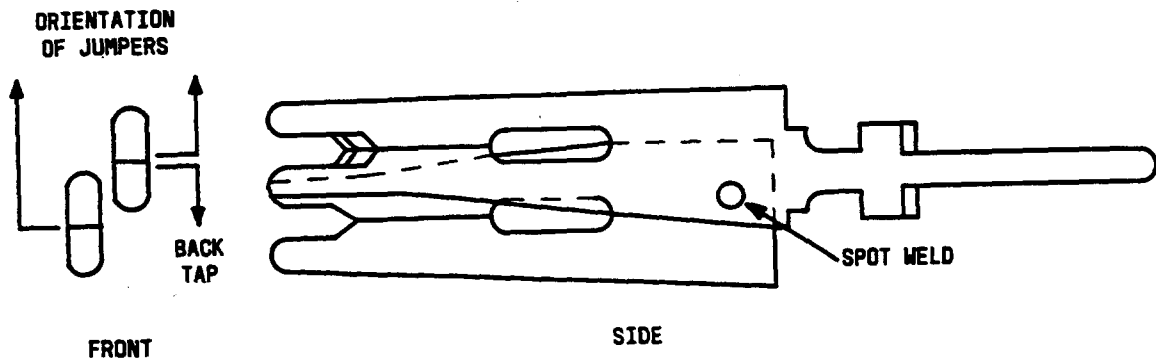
Views of Terminal Used on 78-Type Connecting Block
